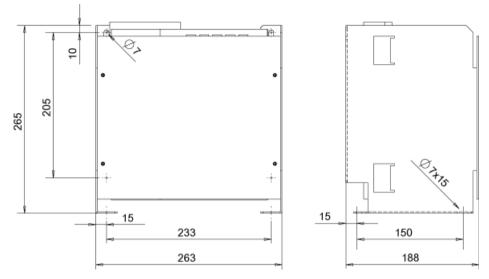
Dimension drawing of the voltage peak limiter, type 1
